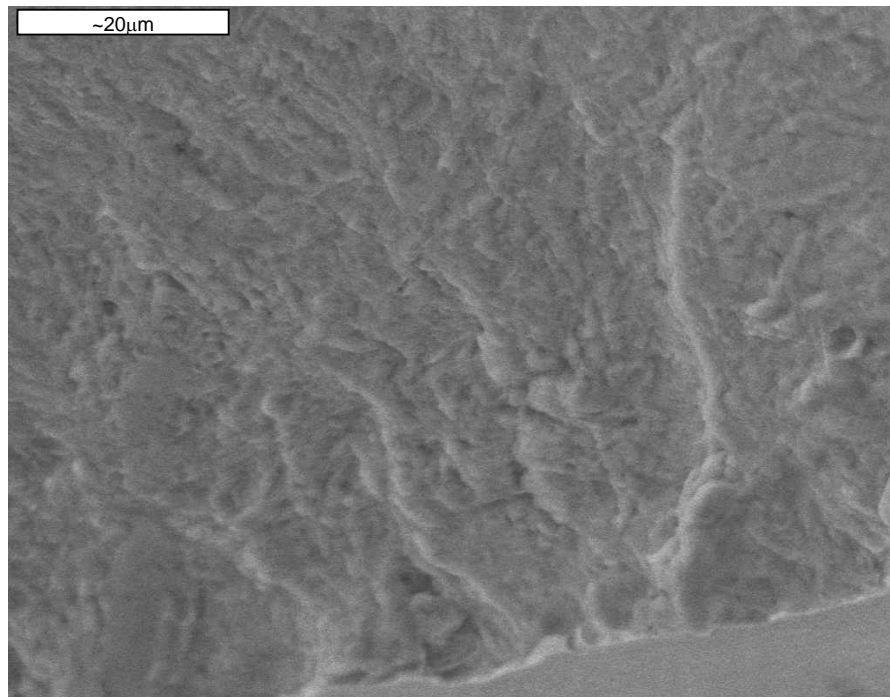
Fracture surface within flat region identified in figure 17.
